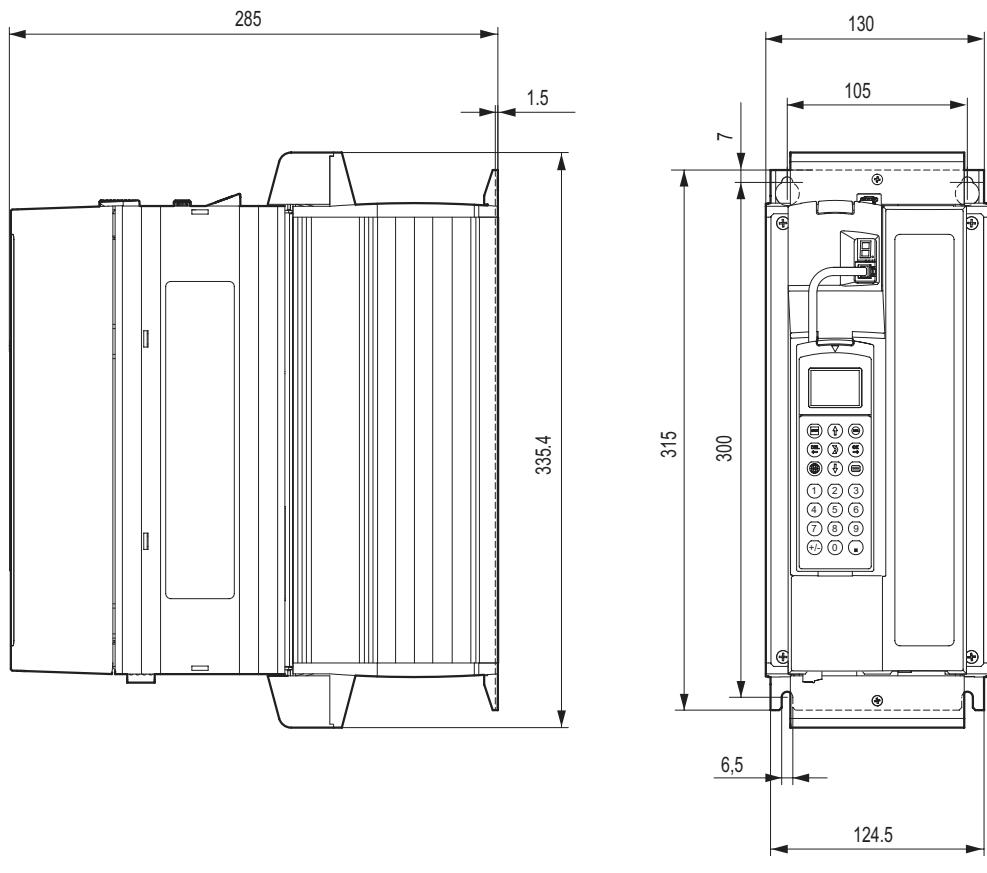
Dimension drawing for MDX61B size 2, dimensions in mm
